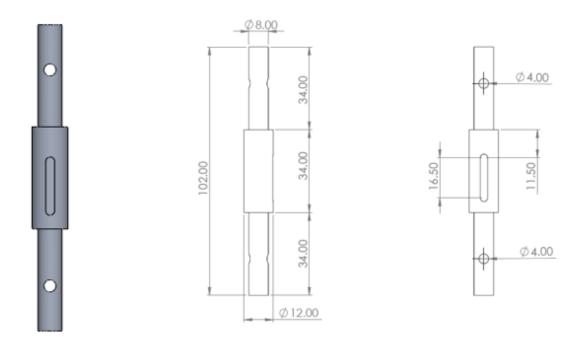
CAD model and dimensions of the Arm 1 worm wheel
